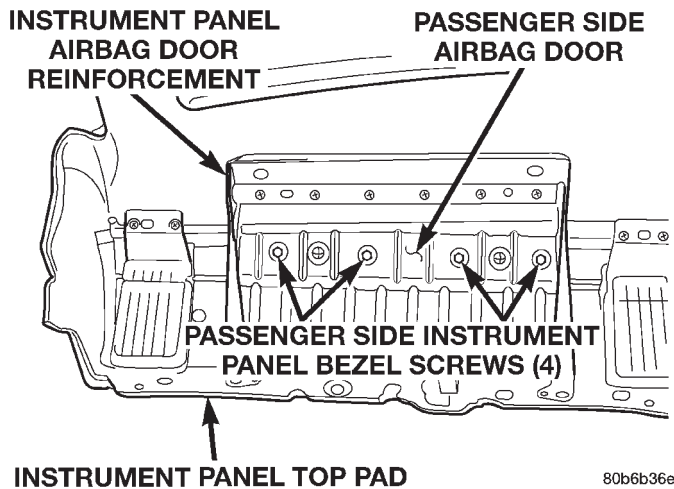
Instrument Panel Passenger Side Bezel Remove/Install
